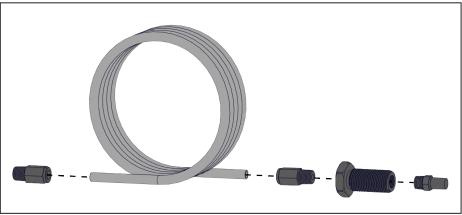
Tubing Installation Remote Blowdown Muffler assembly
